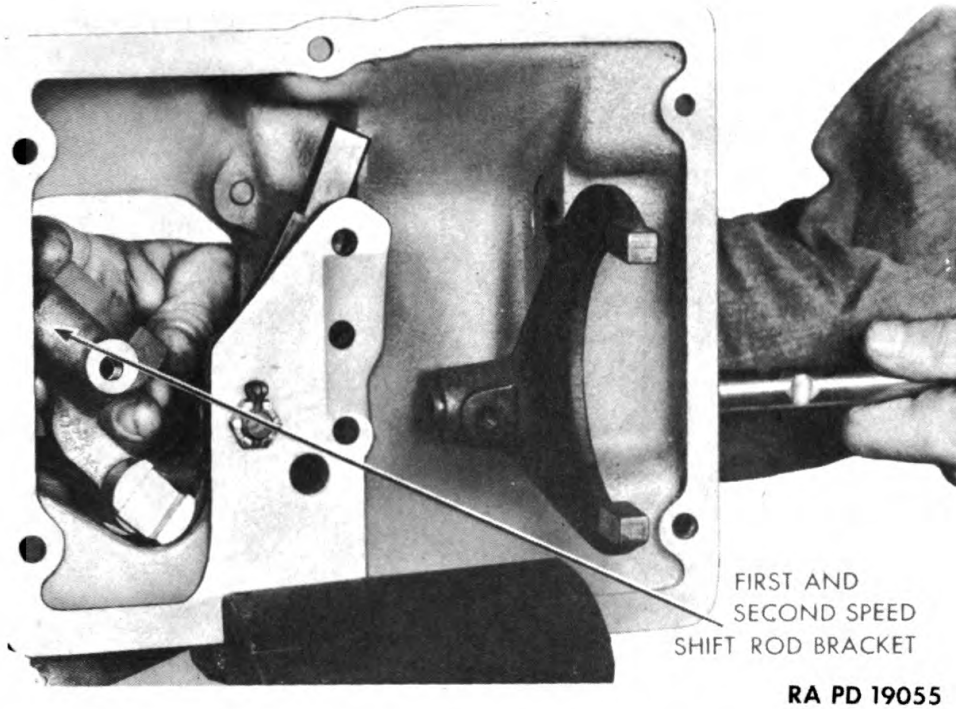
Removing First and Second Speed Shift Rod Bracket
